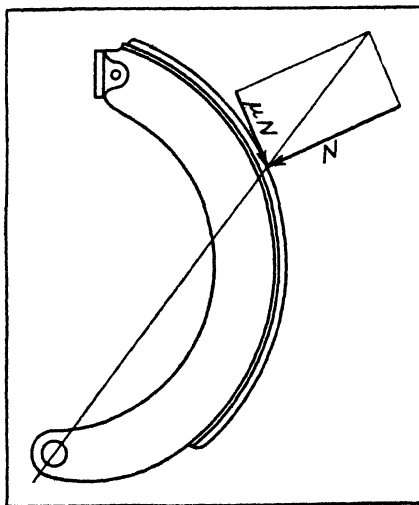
ILLUSTRATING CONDITIONS THAT MAKE A BRAKE SELF-LOCKING.
